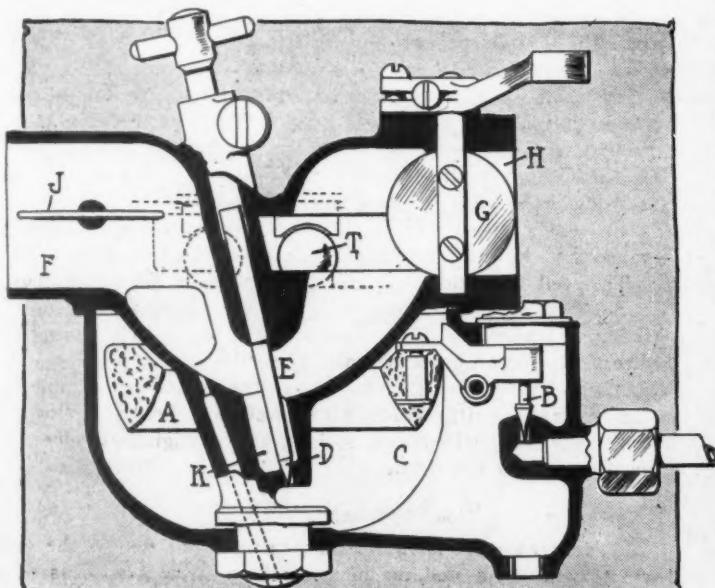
Kingston carburetor uses concentric float and ball auxiliary air valves
